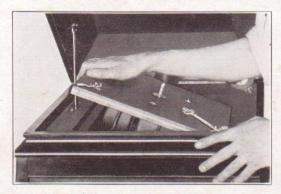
When the screws have been removed, the motor board can be lifted out in this fashion.
